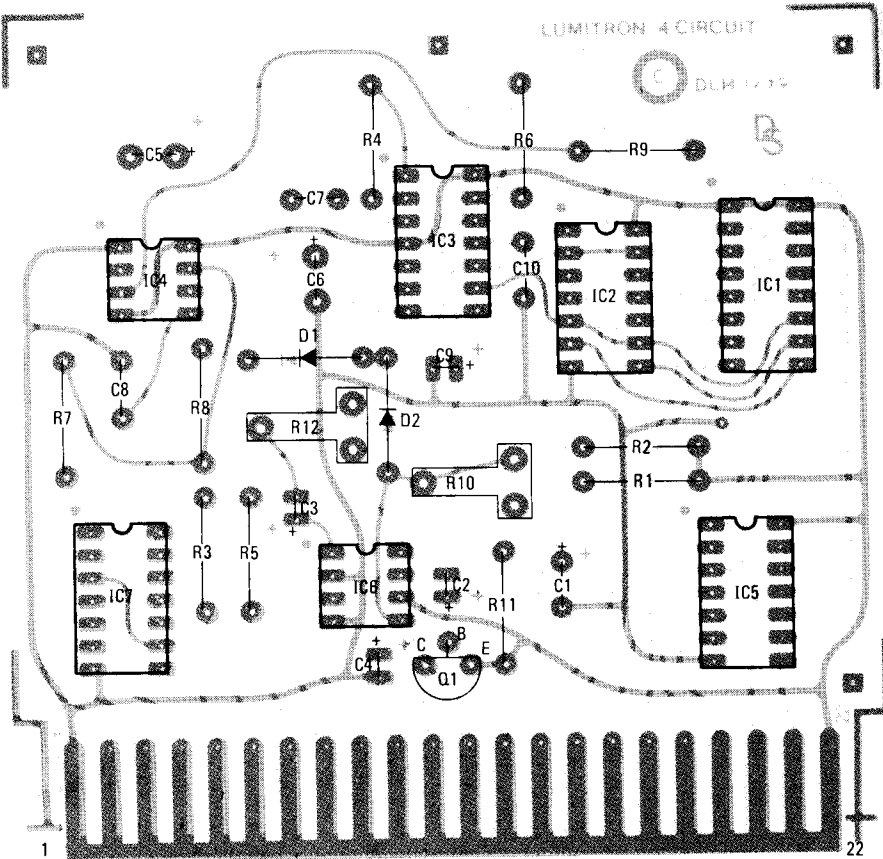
CONTROL-UNIT PC BOARD plugs into 22-pin socket with .156-inch spacing.
